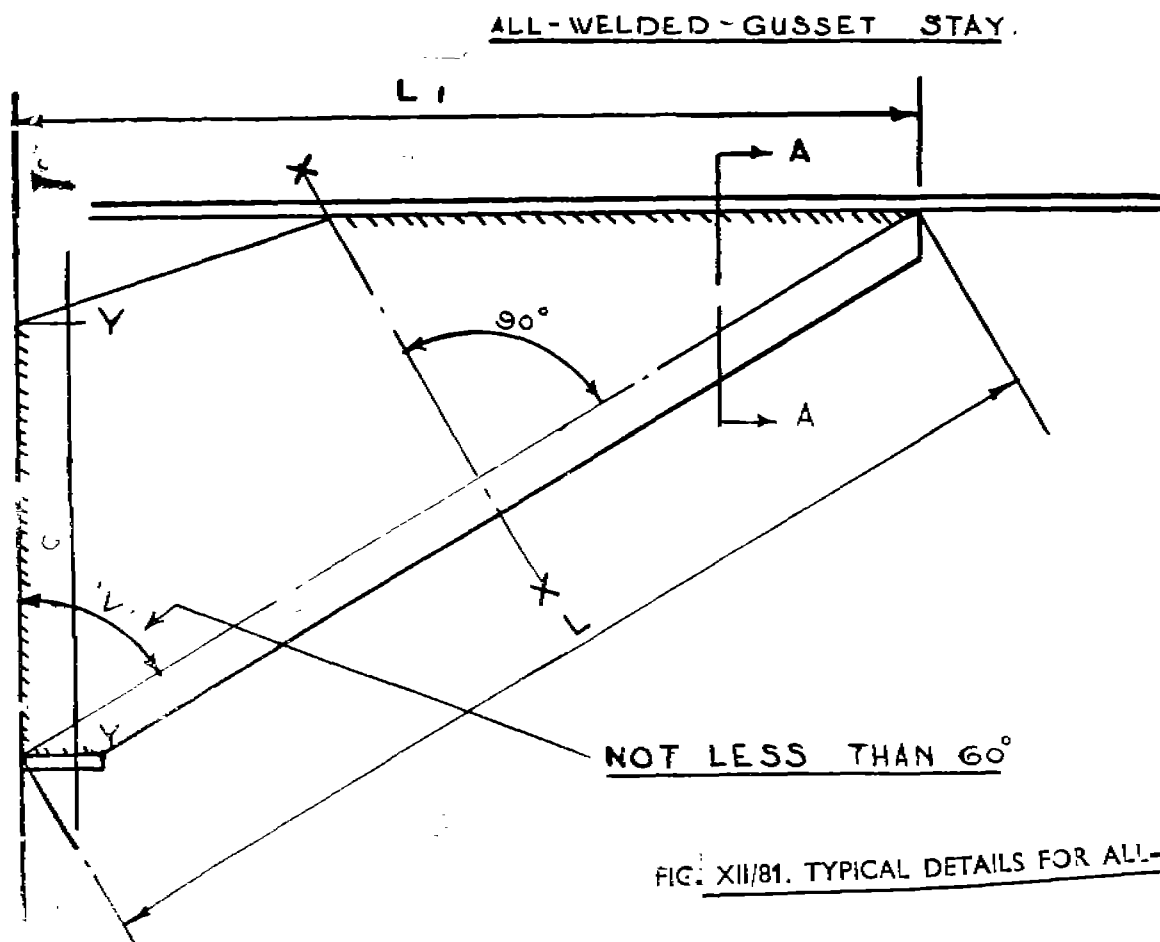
TYPICAL DETAILS FOR ALL-WELDED GUSSET STAYS.
